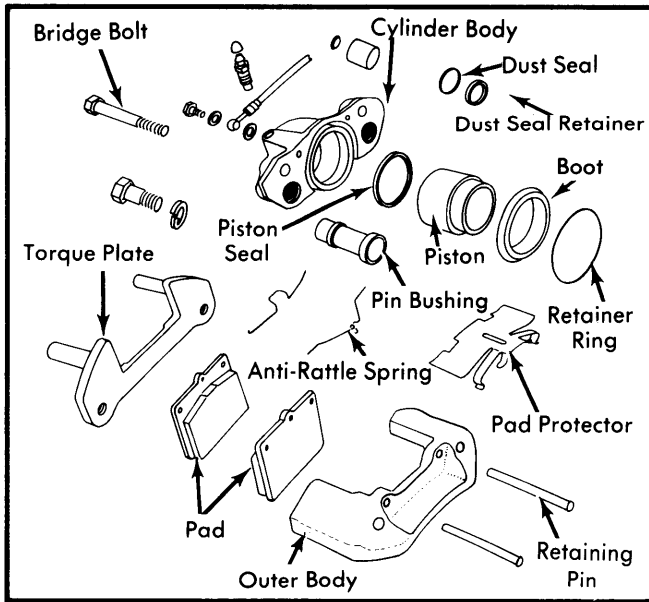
Exploded View of Girling Type Disc Brake Used on Corona, Cressida and Standard Pickups
